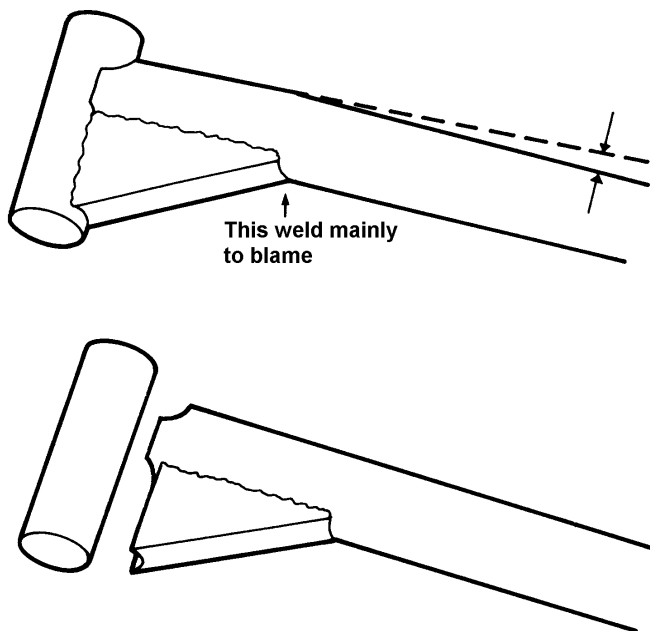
The importance of welding sequence. Adding the gusset last (top) steepens the steering head on cooling, as shown. The simple solution to this problem was to attach the steering head last, after the top tube distortion had taken place (bottom).
